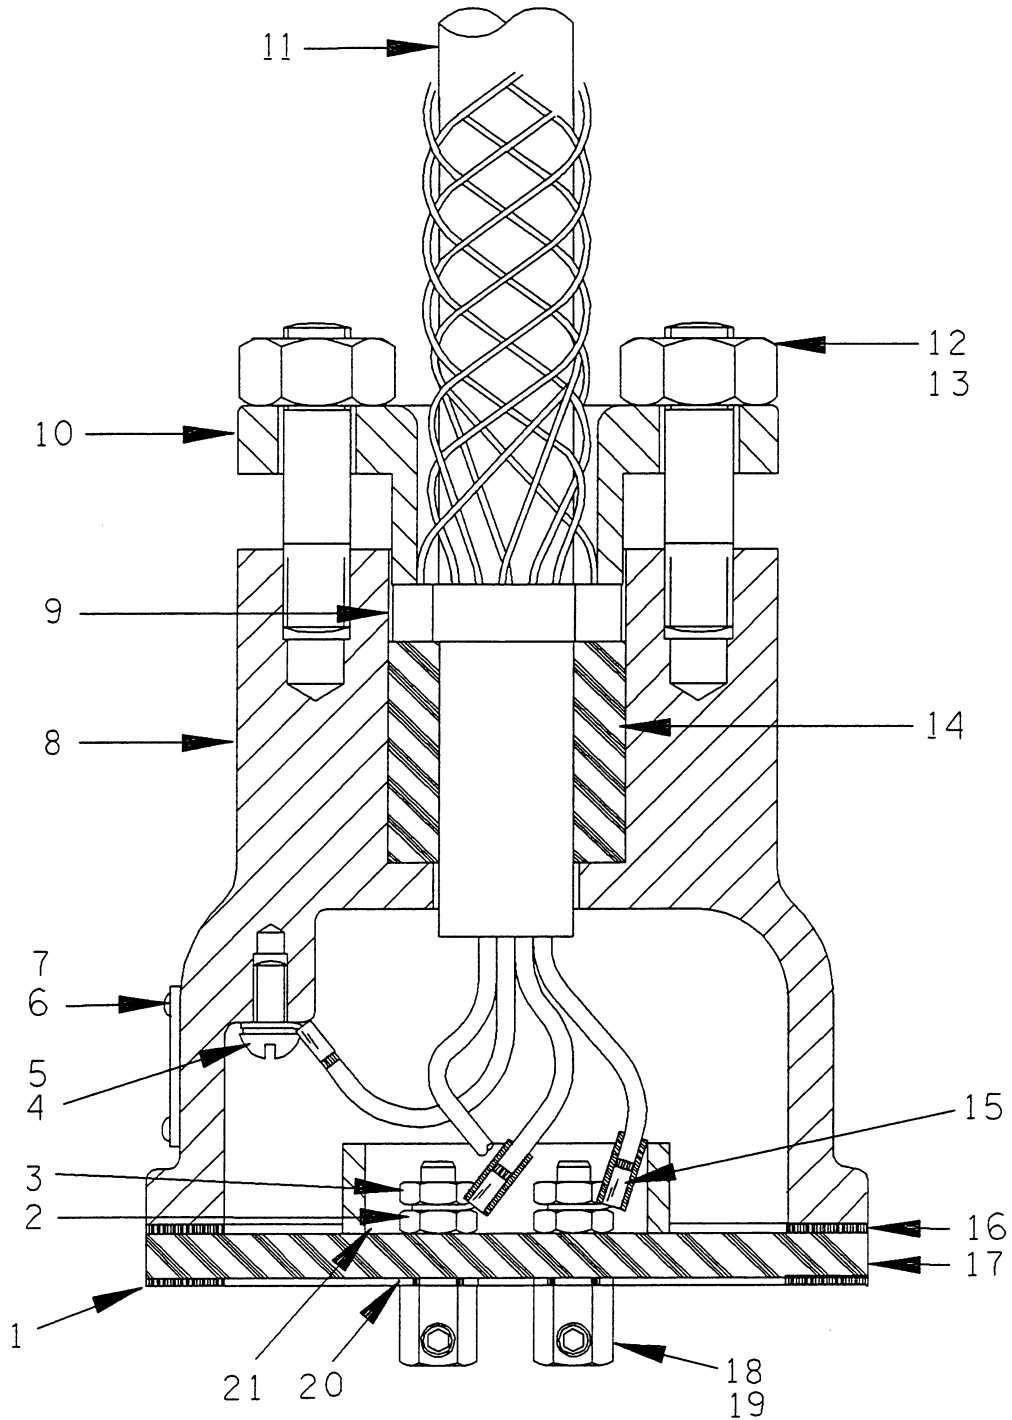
47367-041 Terminal Housing And Cable Assembly
